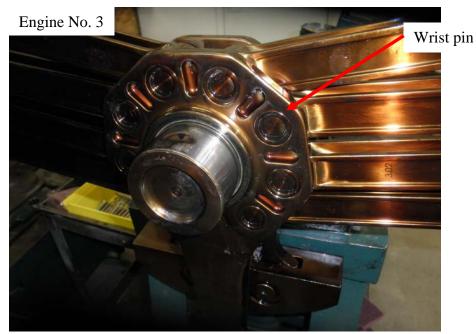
Close up crank shaft showing all of the wrist pins were in place with no damage.
